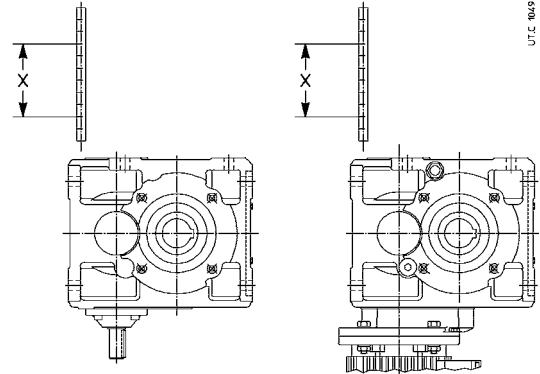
Position the bevel helical gear reducer or gearmotor, mounting position B7 for oil level (quantity) measurement
